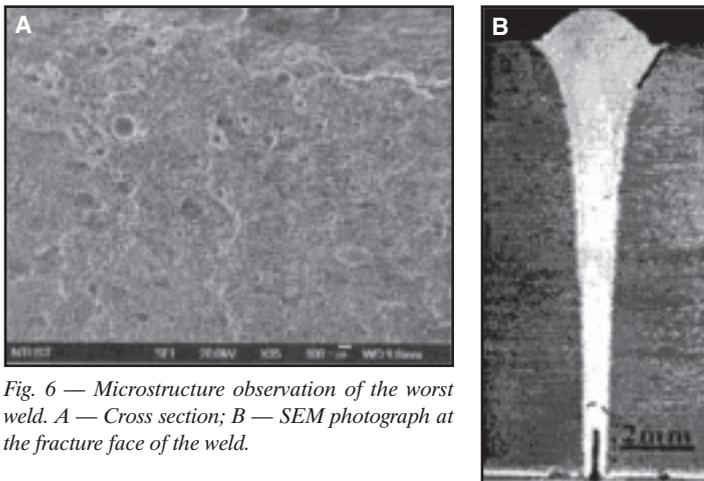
Microstructure observation of the worst weld. A — Cross section; B — SEM photograph at the fracture face of the weld.
